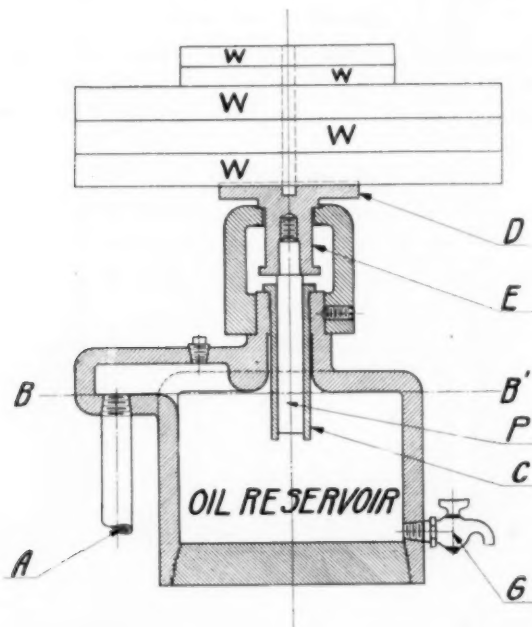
IMPROVED TYPE OF DEAD-WEIGHT PRESSURE GAGE
